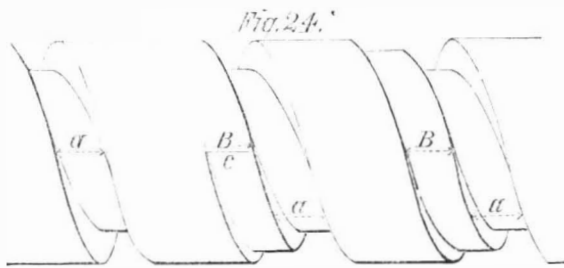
represents a thread or screw during the above described process of cutting. *a a a* is the groove or space taken out by the cuts before the tool was moved; *B B* represents the first cut taken after it was moved; *c* is the point to which the cut, *B*, is supposed (for the purpose of this illustration) to have traveled.
